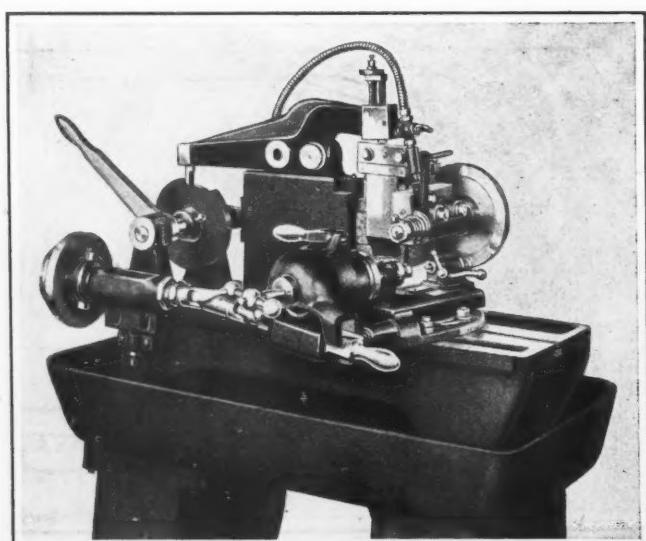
Bilton Semi-automatic Worm Milling Machine
